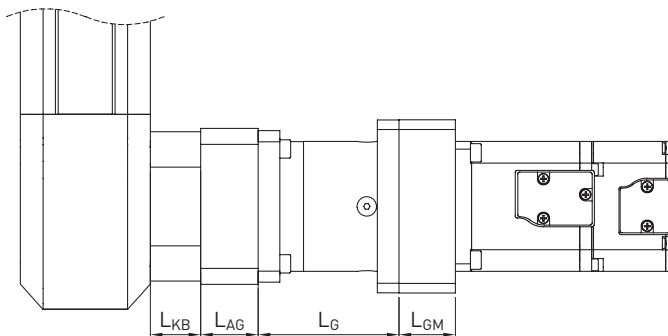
Motor connection of linear module HM-B with gearbox
